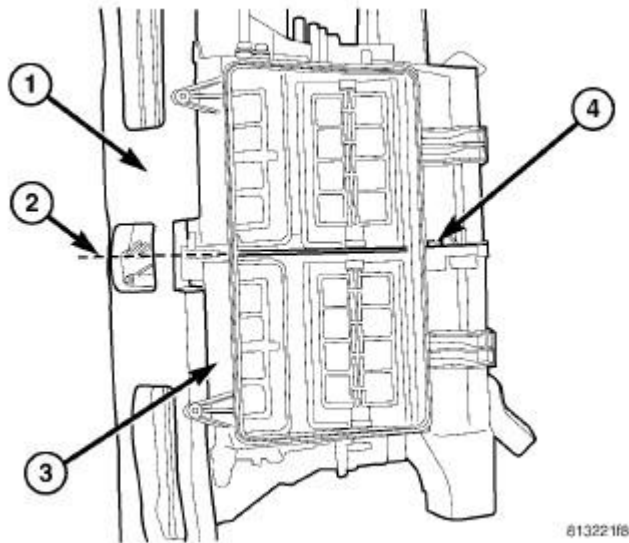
Air Housing-Seal and Screws Removal & Installation
